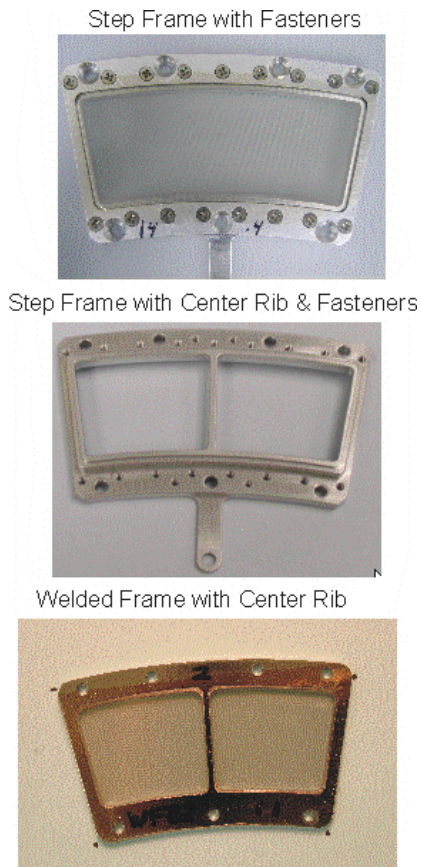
PHOTOGRAPHS SHOWING FOIL HOLDER ASSEMBLY EVOLUTION.
